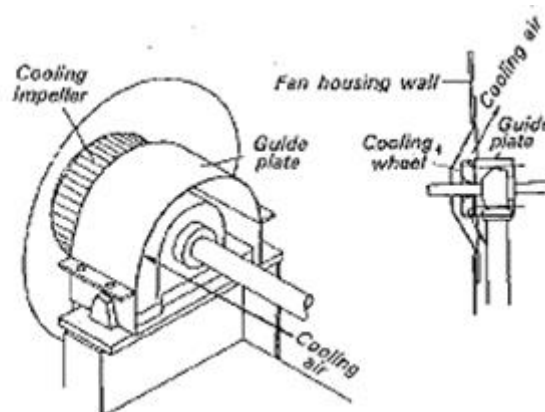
, Example of a cooling impeller used to reduce the temperature in a rotating system [5]
